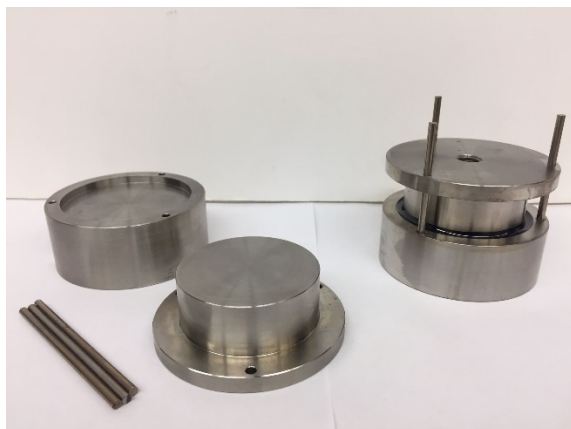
Poker chip stainless-steel mold and laboratory-molded specimen between the top and bottom pieces that are aligned using three alignment pins (top and bottom of the mold with the three alignment rods are shown to the left and an assembled mold with the binder sample is shown to the right)
